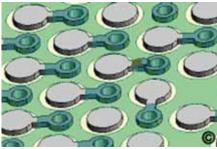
Mix epoxy and coat lap solder joint connection and exposed copper area.
